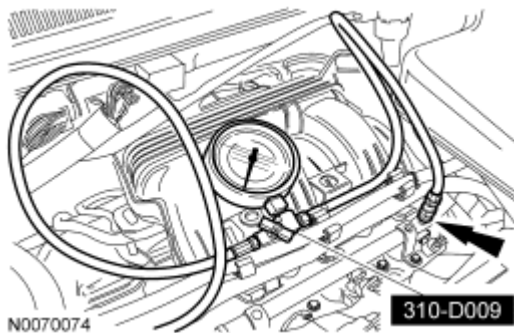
Installing Special Tool (310-D009) & Slowly Open Manual Valve To Relieve Fuel System Pressure
